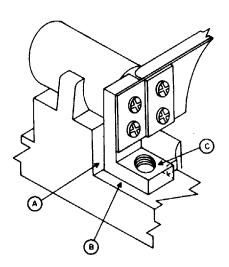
Bias Spring Bracket and Clapper Assembly for Type 860 Ringer.
